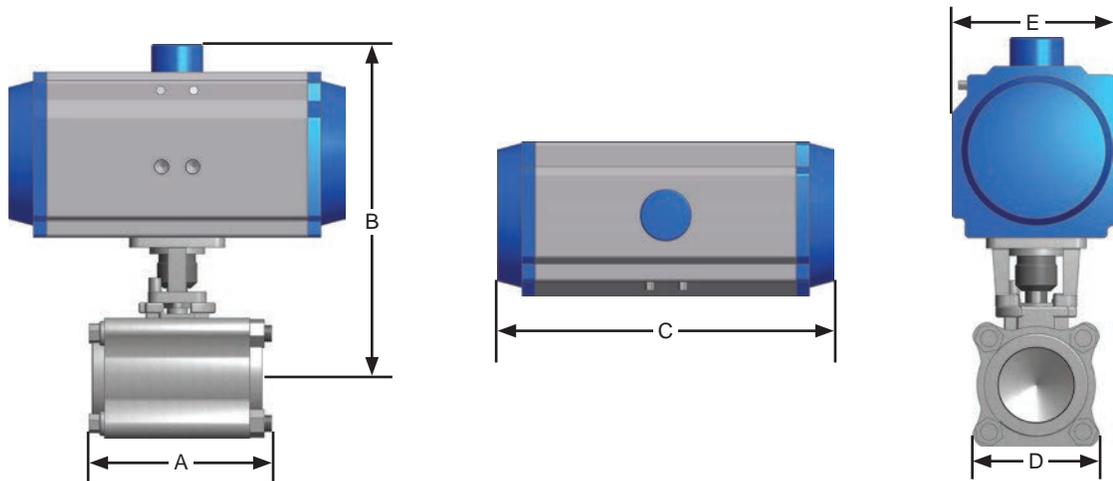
Pneumatically Actuated Ball Valve Dimensions
